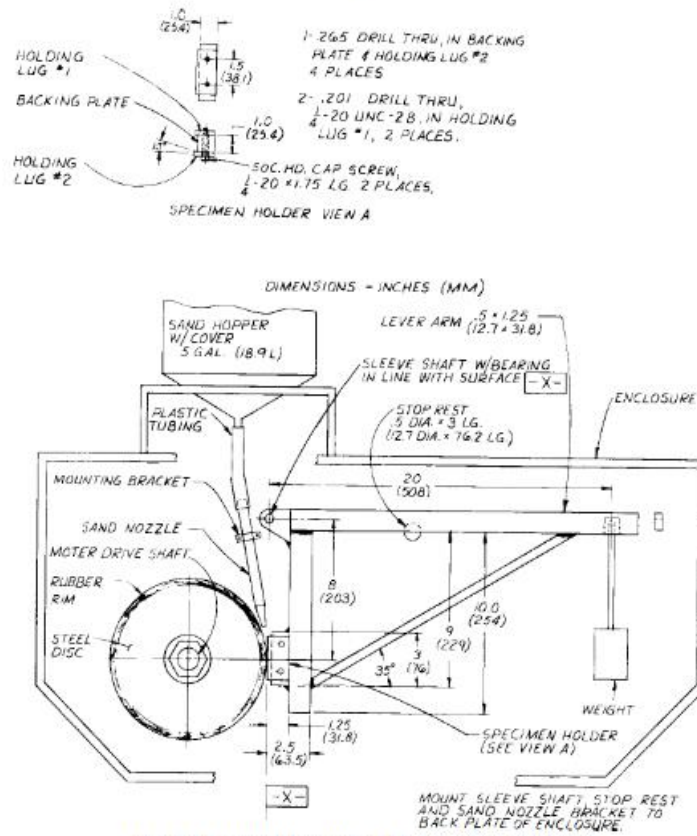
Dry Sand/Rubber Wheel Abrasion Test Apparatus
